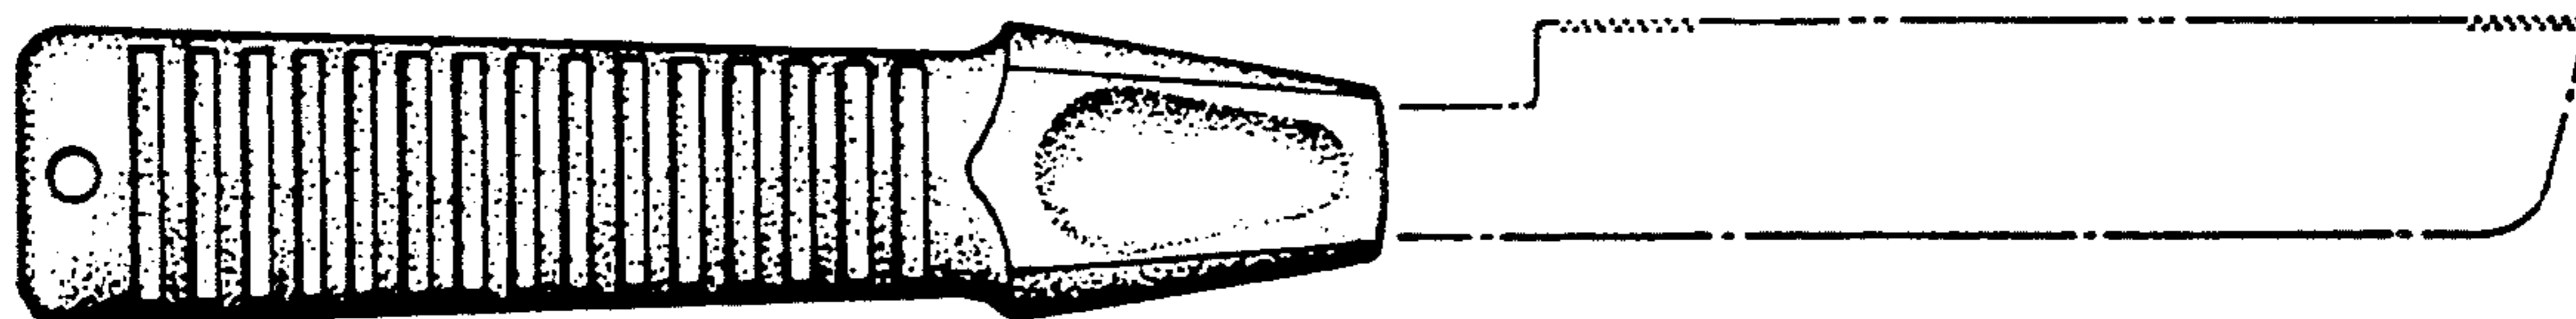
is a top plan view of the saw handle shown in FIG. 1;
